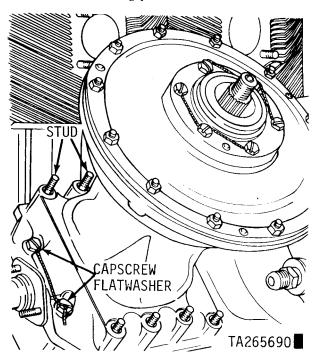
Removing or installing front fan drive housing attaching parts — rear view.
